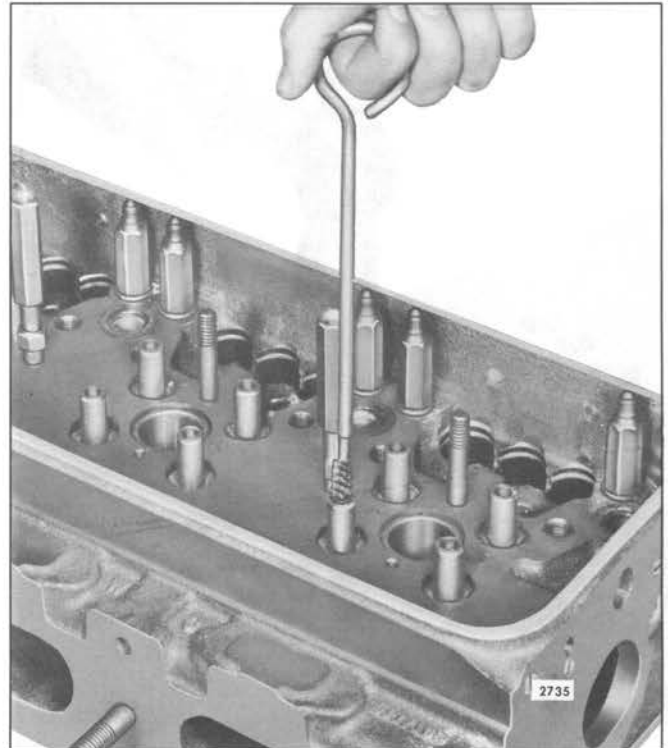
Cleaning Exhaust Valve Guide with Tool J 5437
